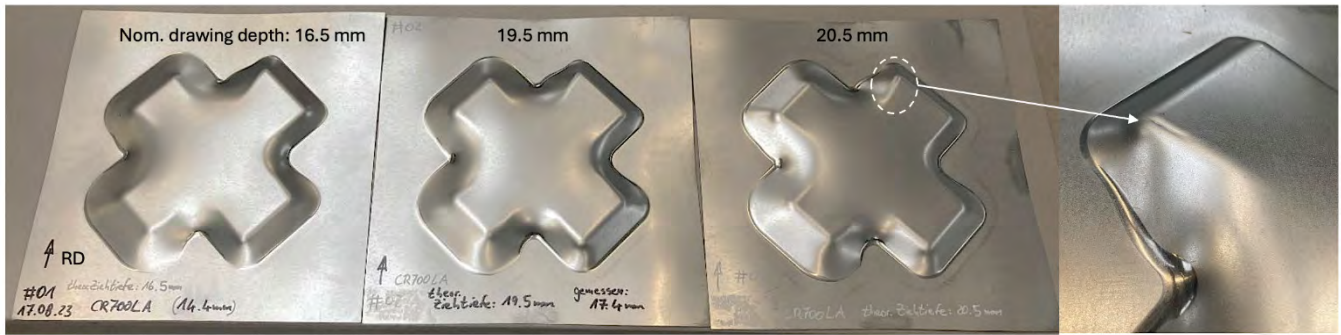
Cross-die deformation of CR700LA GI Super-HSLA steel at different drawing depths and detail of local necking area.
